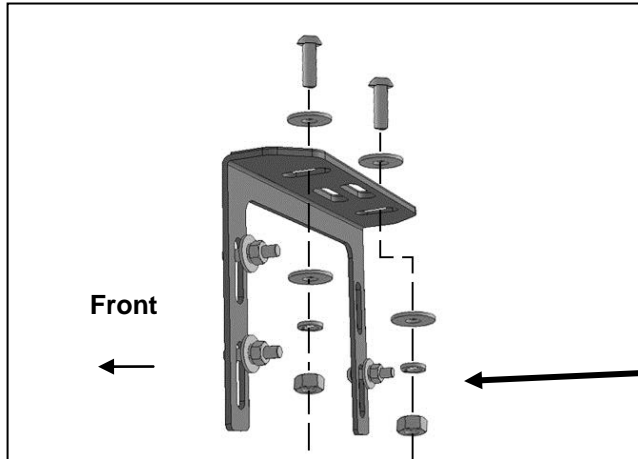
F-150 Models. Hold Relocation Bracket assembly up to underside of top of grille. Locate flat location to mount assembly (dashed line). Mark suitable hole locations on Bracket (see Fig 11 & 12) to drill.
